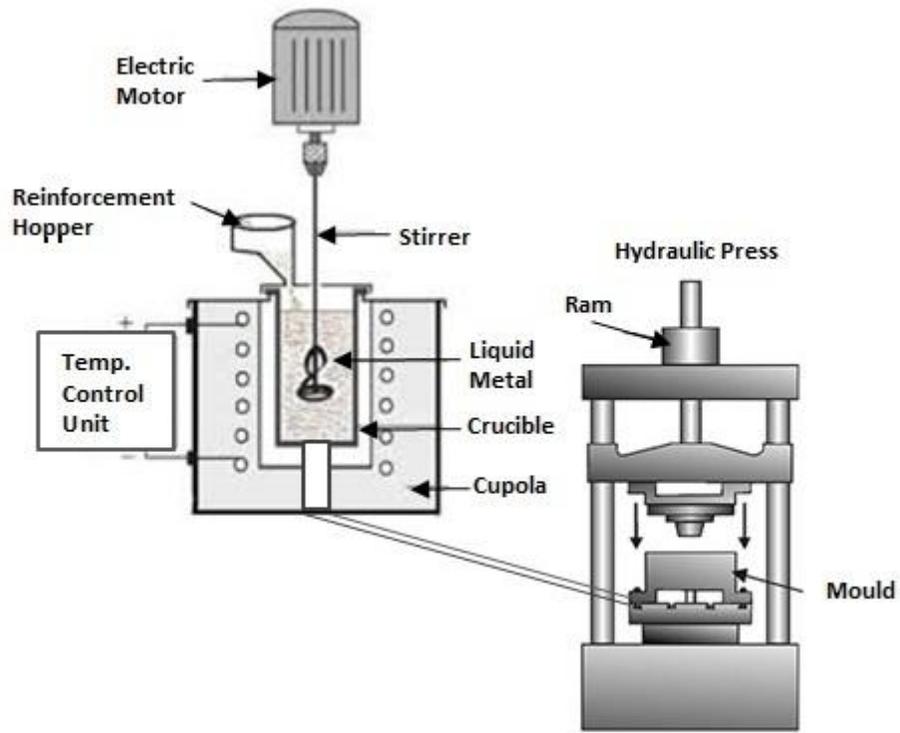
Bottom type stir casting set up with squeeze casting attachment
